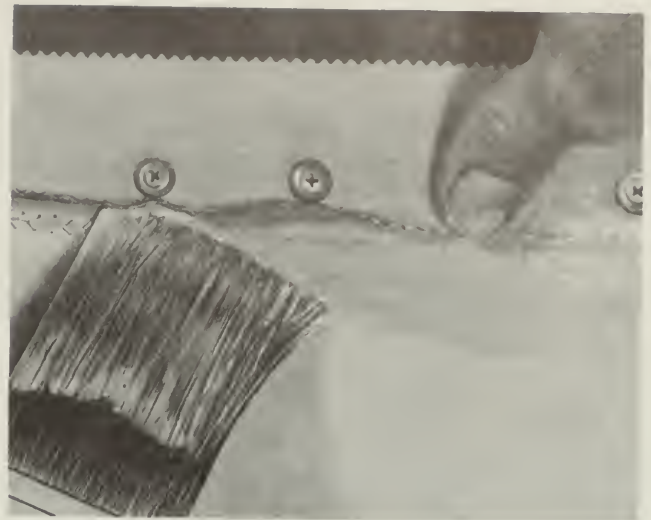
Rubbing Down Reinforcing Tape at Fabric Section Seams
